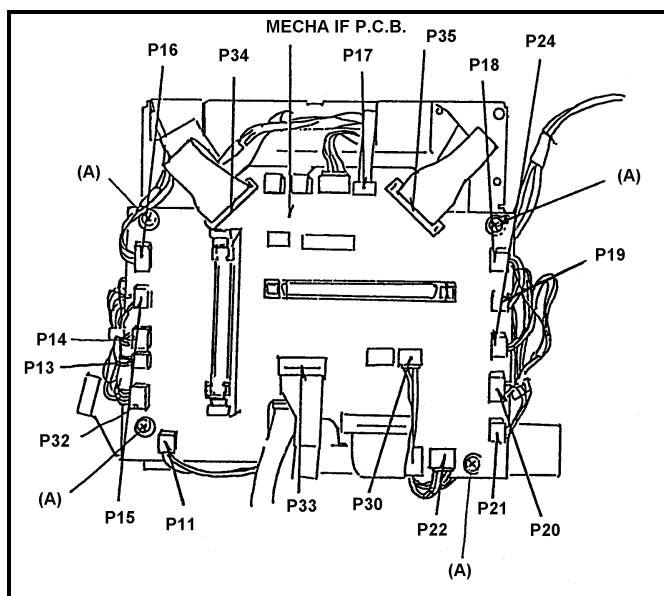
Connection of S & T Reel Rotor Unit
